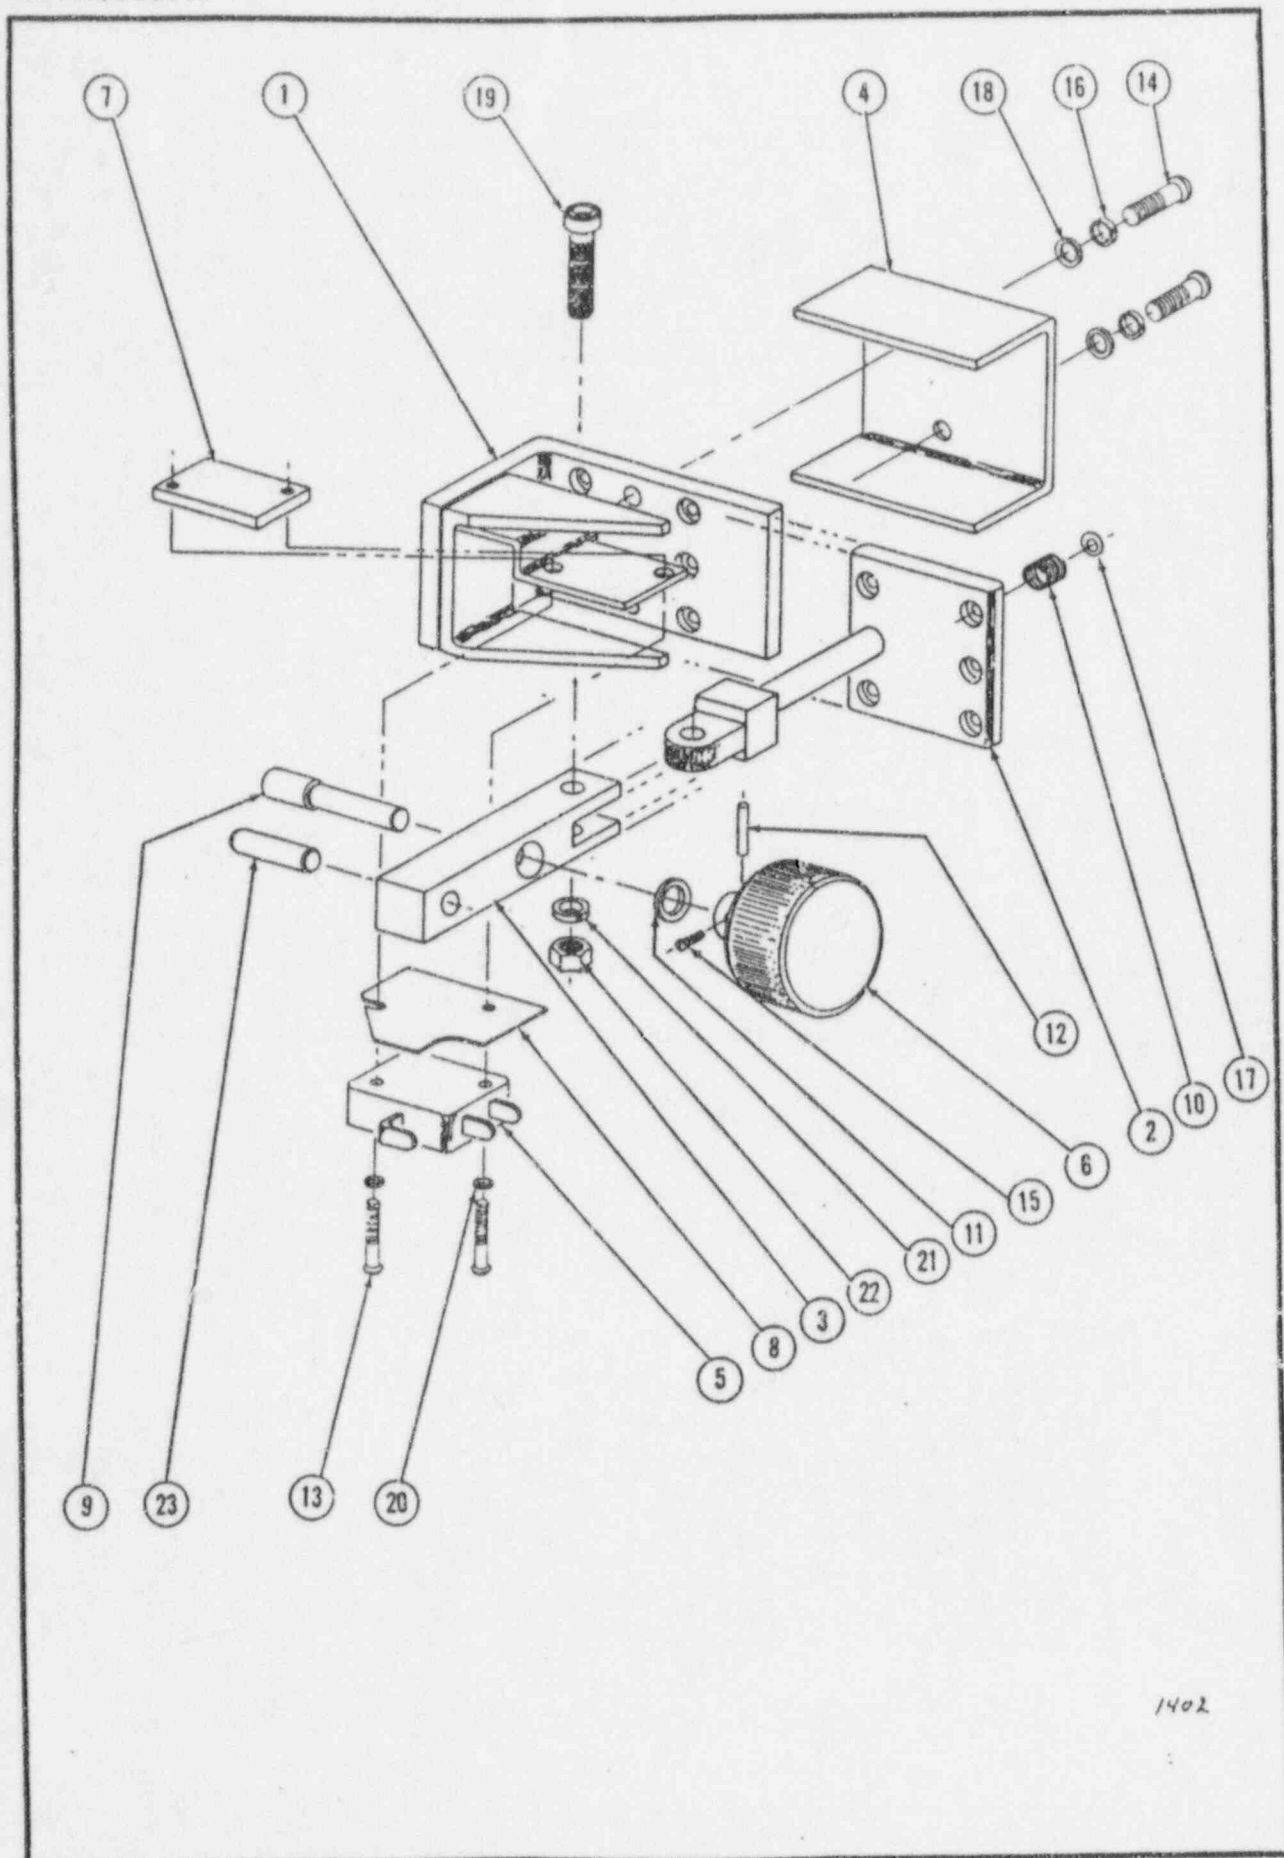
HALO SWITCH ASSEMBLY - Part No. 181558
